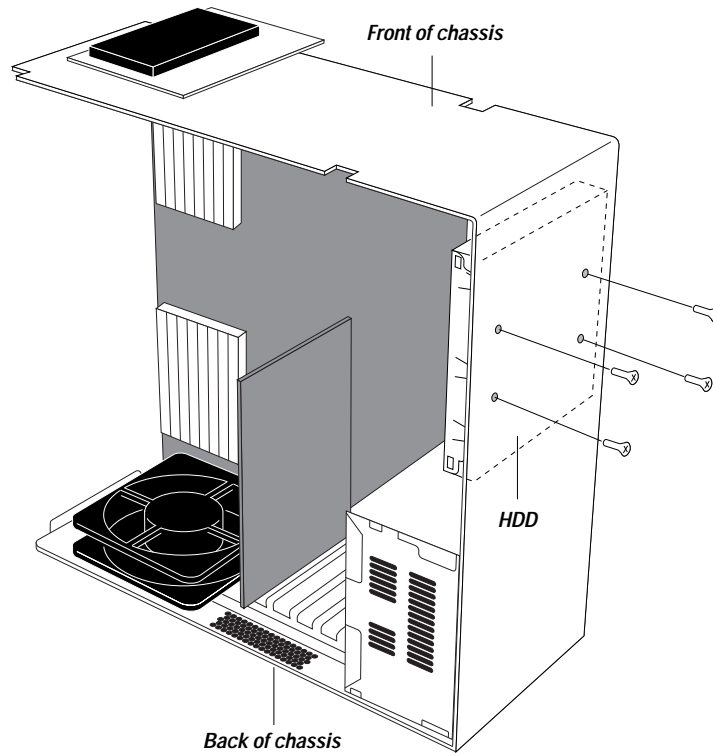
Disk drive mounting screw holes on chassis exterior
